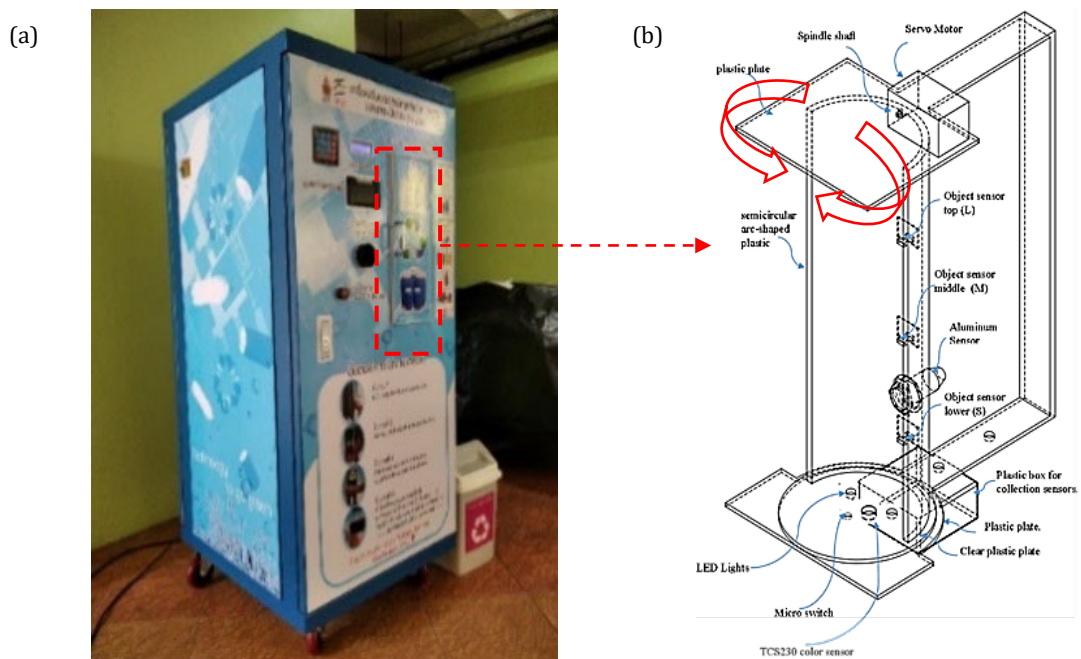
Machine design; (a) The successfully developed prototype, and (b) Internal structure of a reading unit
